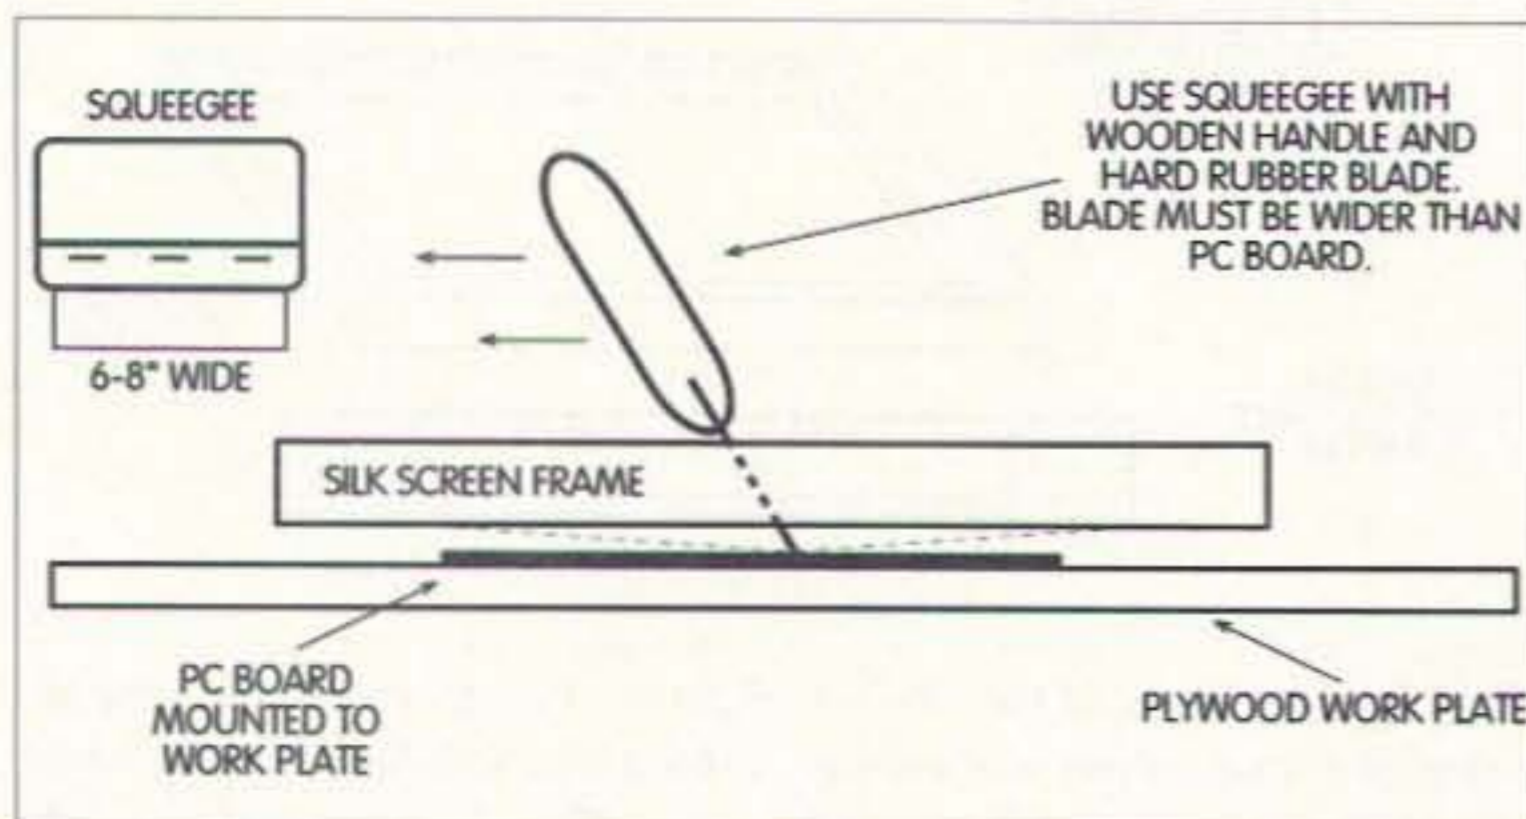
Front view of silk-screen printing shows rubber squeegee pulled over the pattern on the screen material to draw ink along inner frame over the pattern for deposit onto the PC board.
